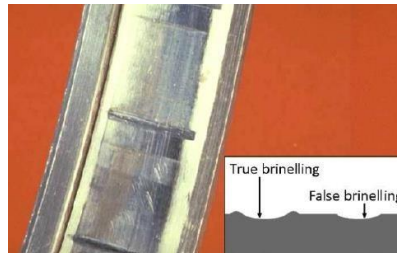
12: Bearing surfaces damaged by fretting wear (Vencl et al. 2017)
